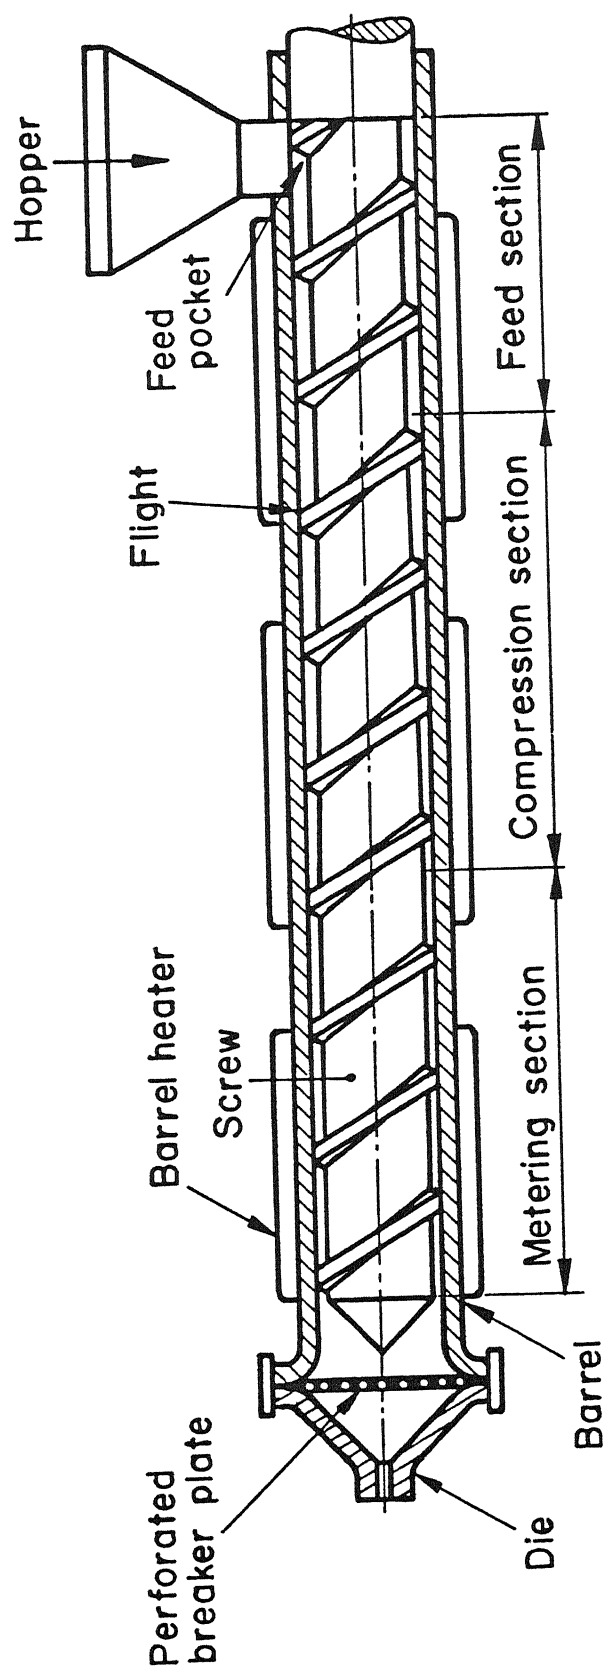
Sectional view of a typical single-screw plasticating extruder.
